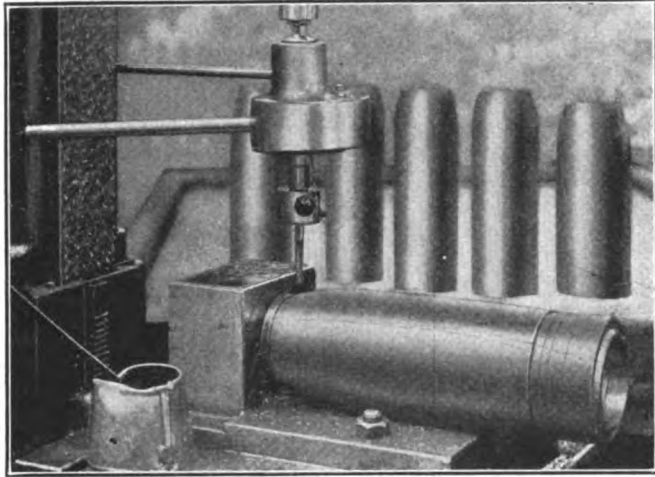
TAPPING THE FIXING-SCREW HOLE
